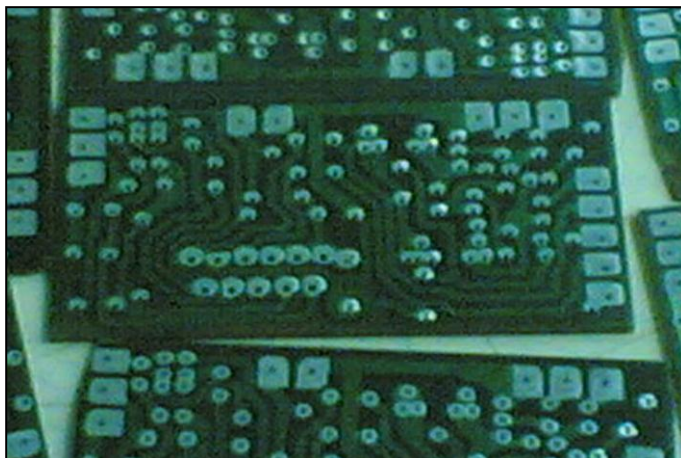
A scrap of finished PCB after drilling and soldering with Sn/Pb alloy
